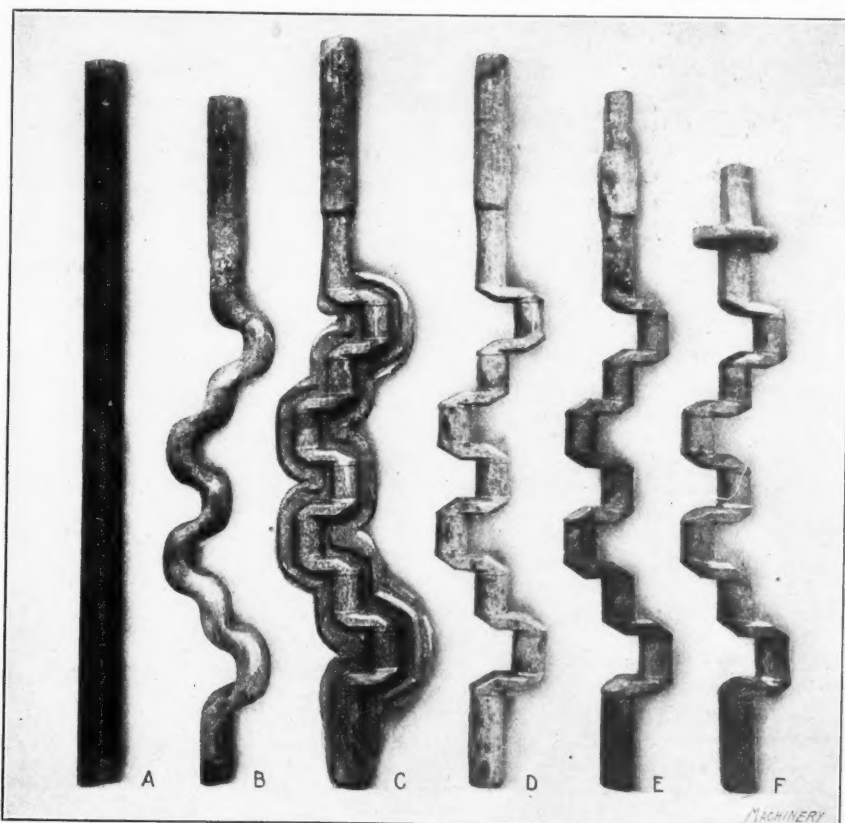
Evolution of a Four-throw Crankshaft from the Straight Bar to the Final Shape—Illustrating Sequence of Drop-forging and Upsetting Operations
